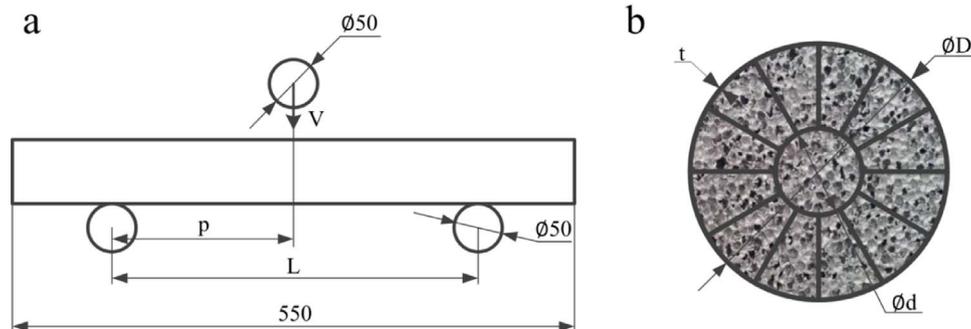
Loading condition and cross section of FBTS: (a) Loading condition and (b) cross section.
